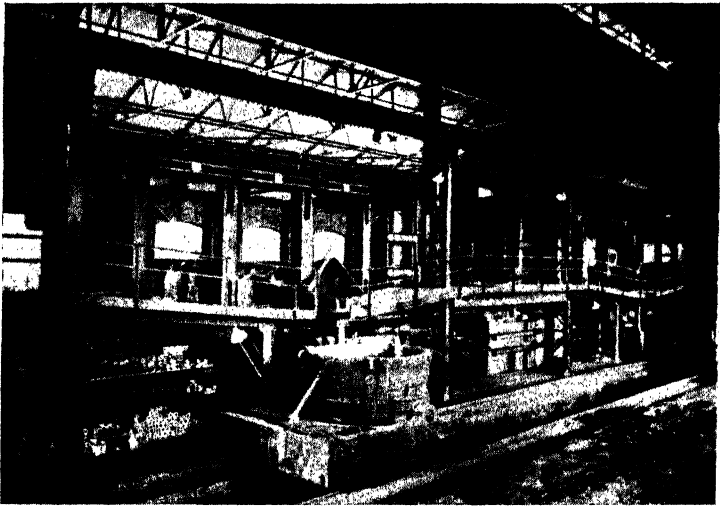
A 40-ton Open-Hearth Furnace. Fixed Type.
